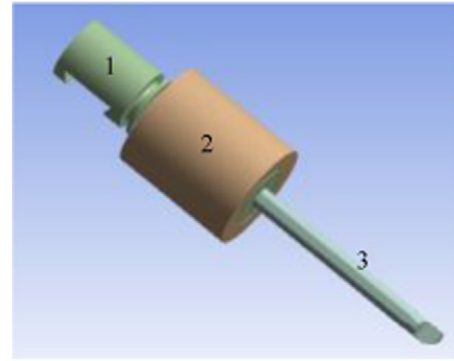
Boring bar–holder assembly design concept (1 – holder, 2 – sleeve, and 3 – boring bar).
